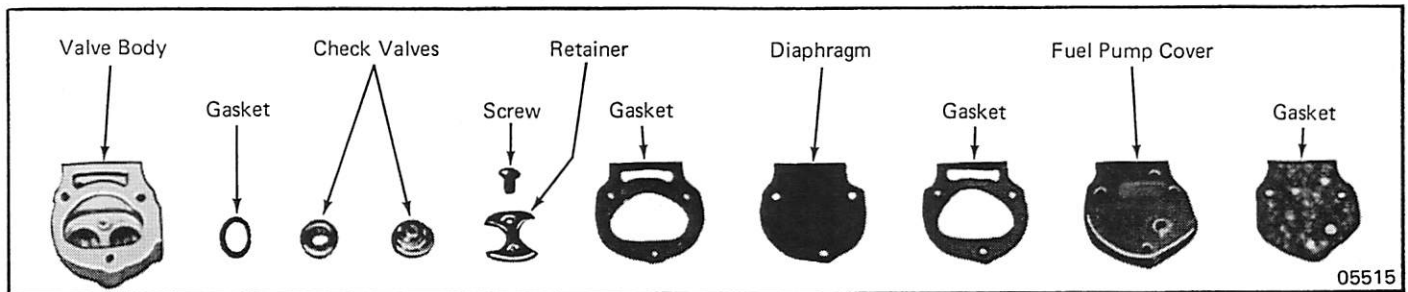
Fuel Pump A-30269A2 and A-23009A1 Type, Exploded View
